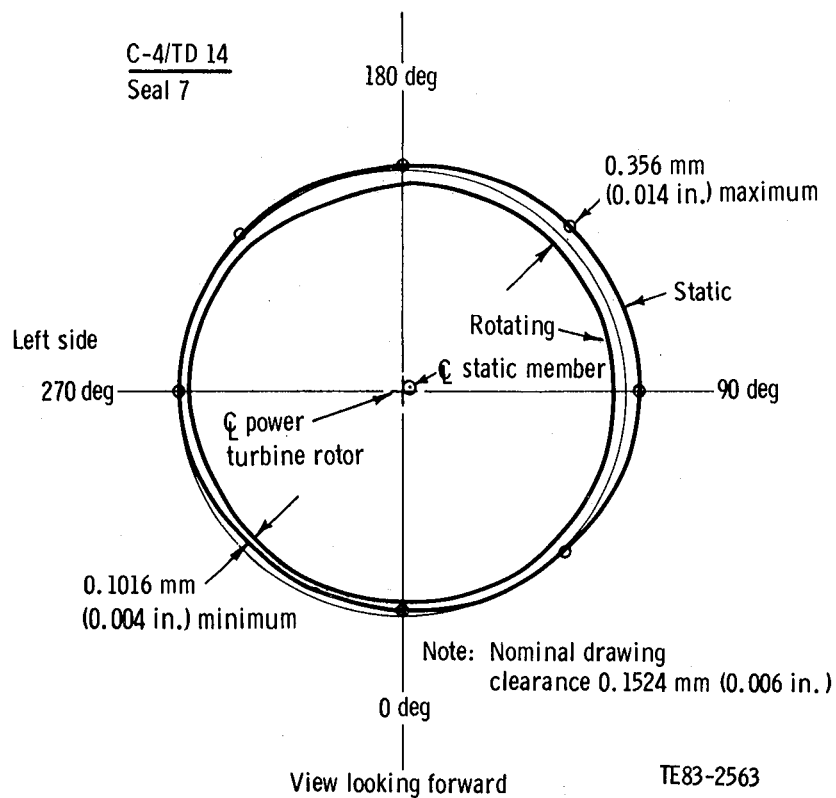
Engagement of labyrinth seal 7 for engine C-4, TD14.
